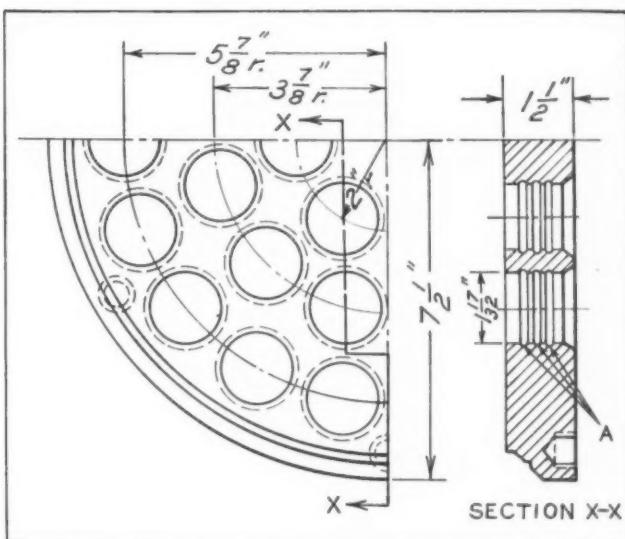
Section of Steel Disk with Thirty-six Holes in which Grooves *A* are Rolled
